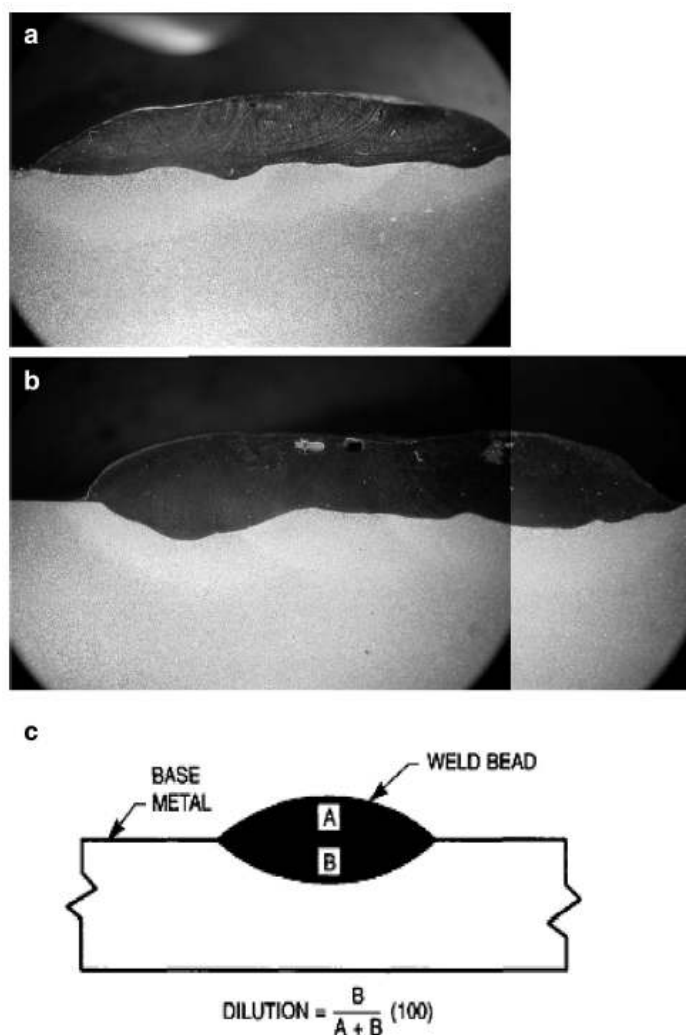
a. Macrostructure of the weld deposit layer using electrode B. b. Macrostructure of the weld deposit layer using electrode C. c. Calculation of percent dilution = $B/A+B$ %
